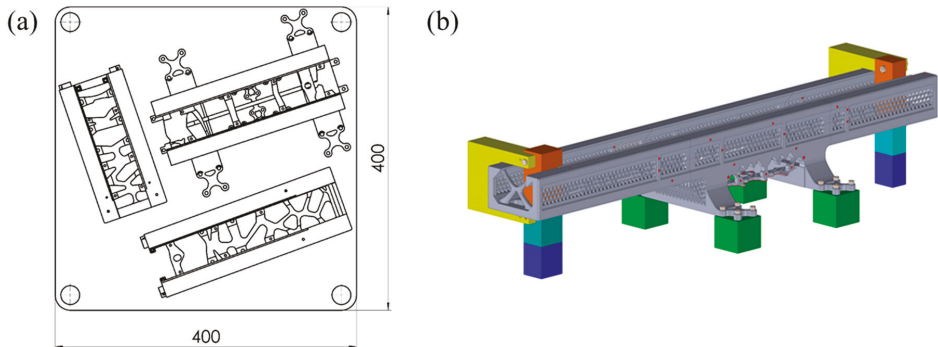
(a) manufacturing orientation for L-PBF production by EOS M400 and (b) machining using a three-axis machine.
